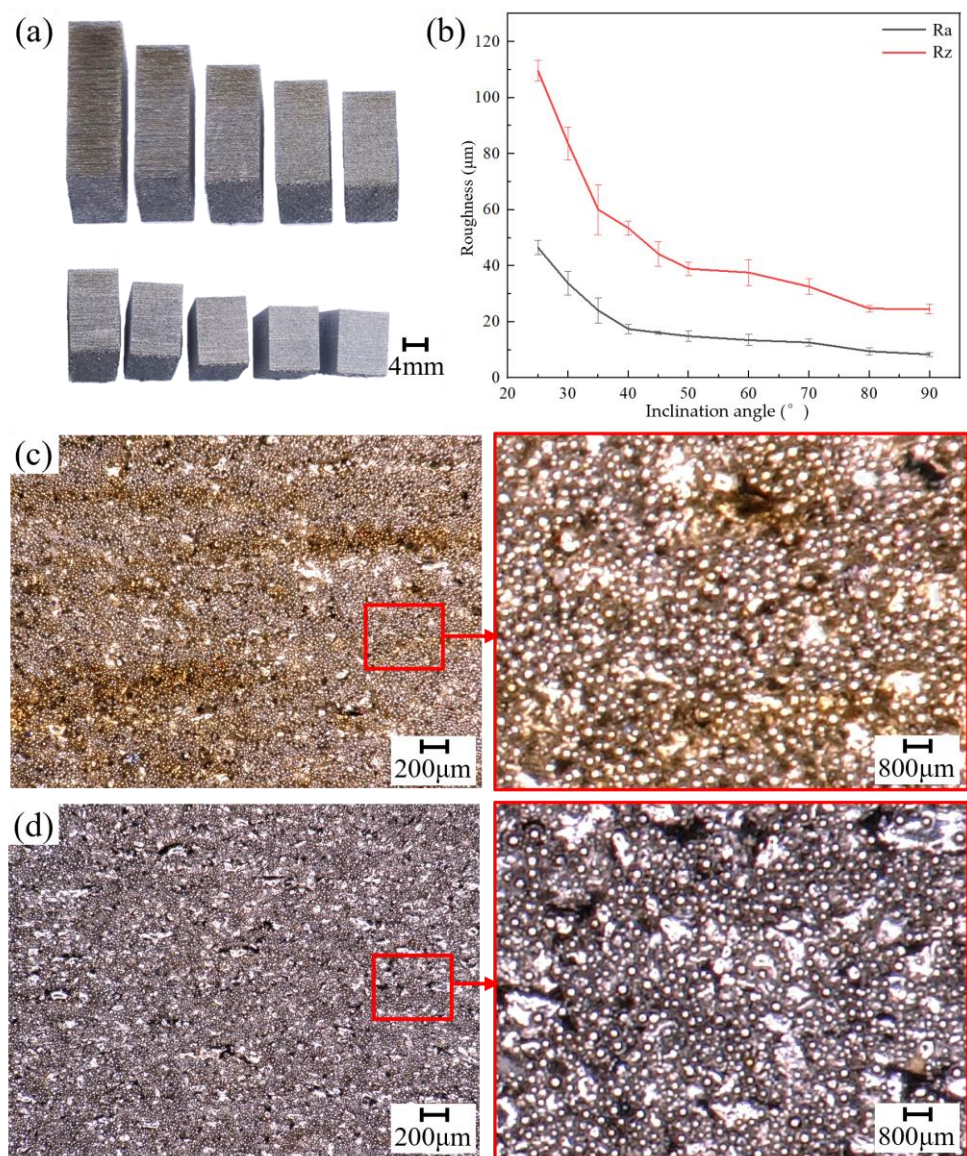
Lower side of parts with different inclination angles: (a) forming effect; (b) roughness curves; (c) 25° macroscopic morphology; (d) 90° macroscopic morphology.
